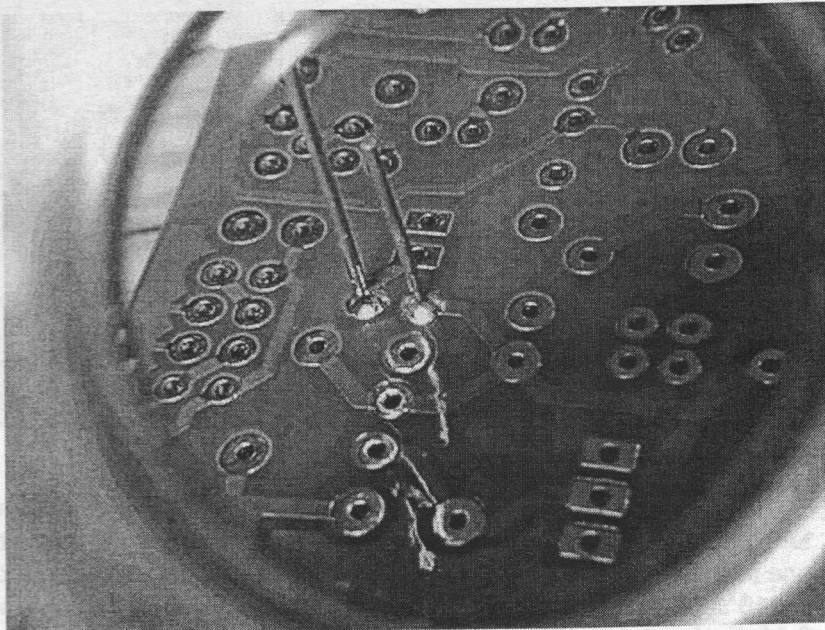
Diode D13 bottom side of the PC board after being soldered.
